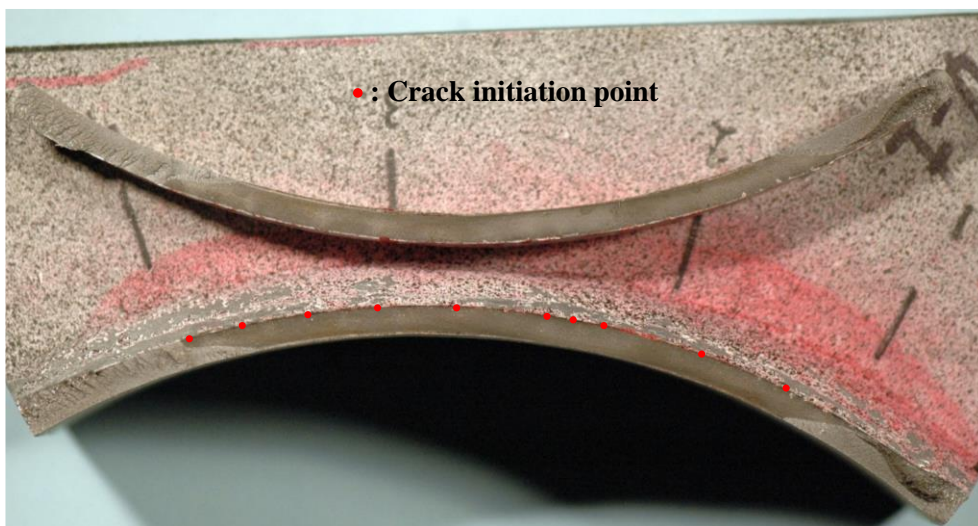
Fatigue fracture surface and identified crack initiation points in Type I-7 Arm
